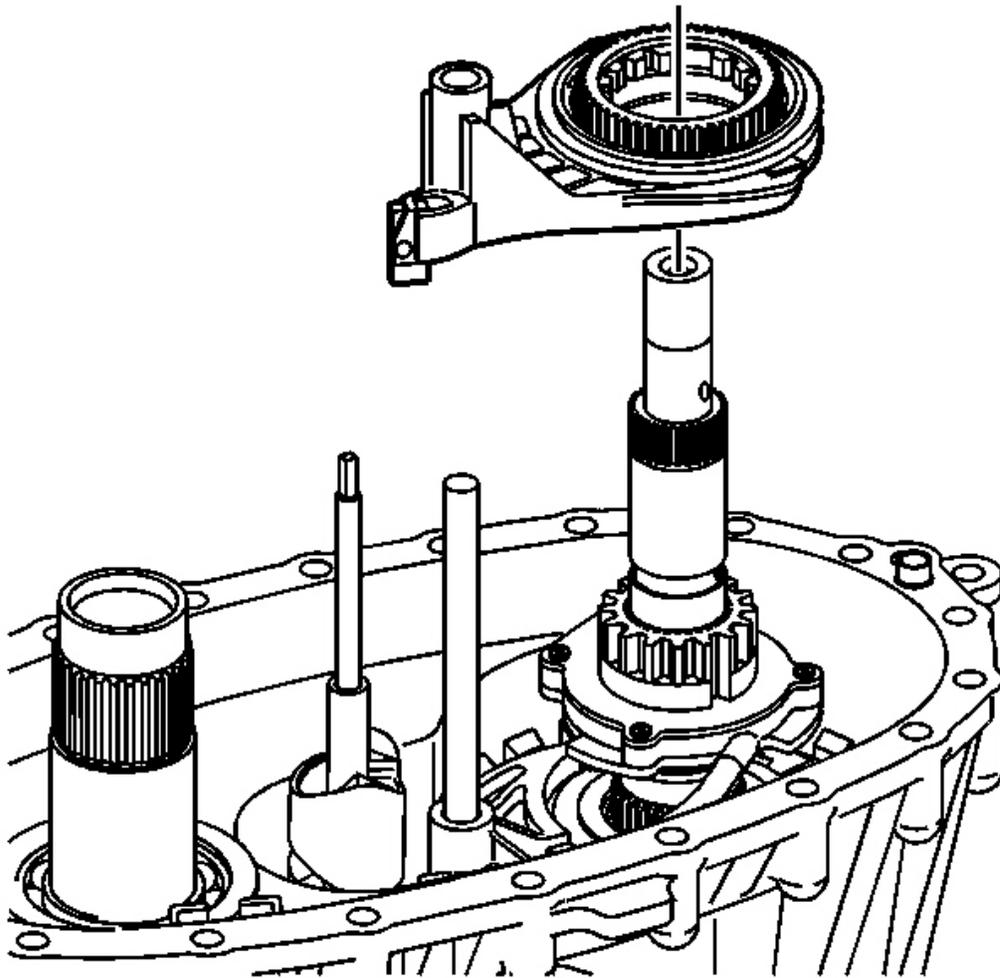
Identifying Lockup Shift Assembly & Lockup Mode Shift Fork
